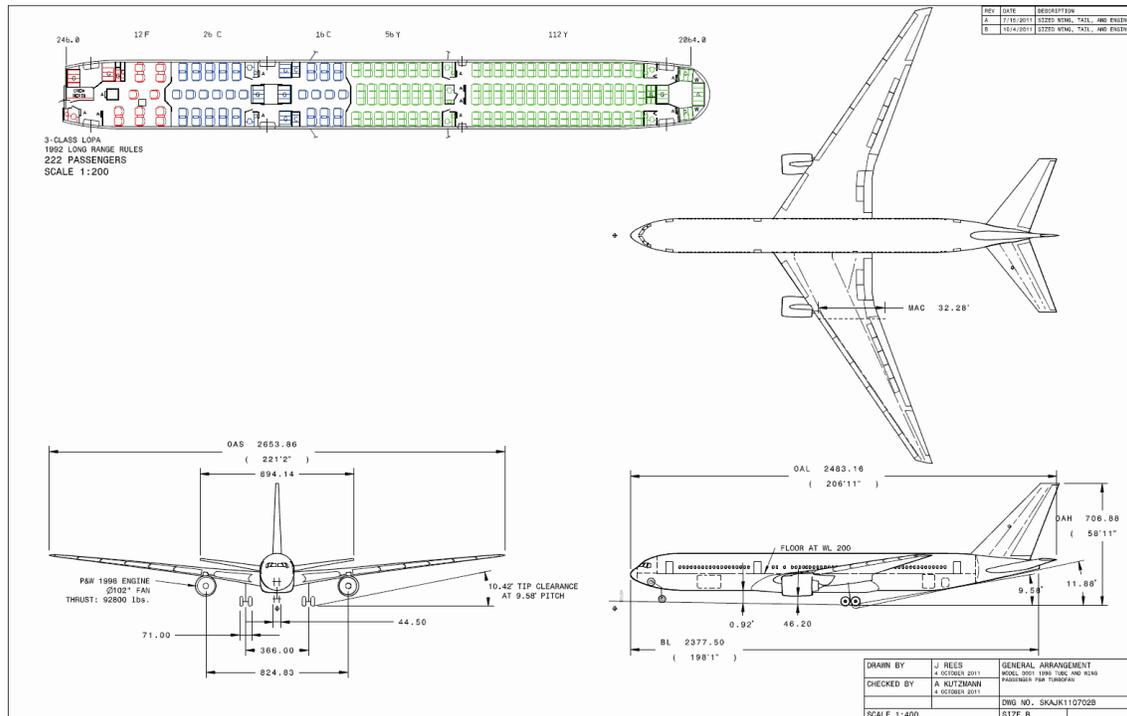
General Arrangement Drawing – 1998 T&W-0001 Passenger
